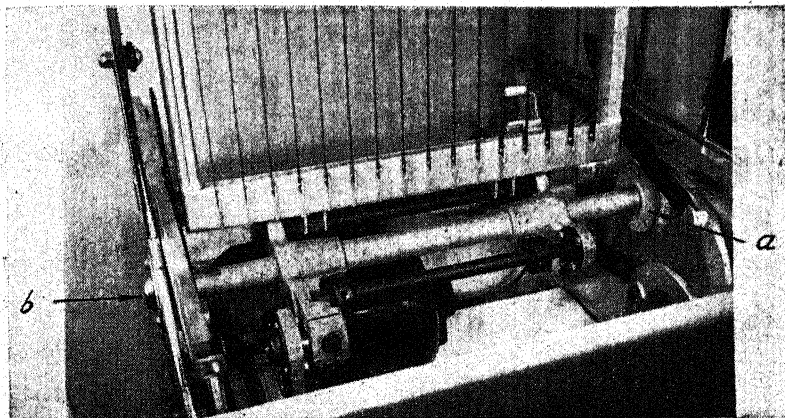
Rocker supported at ends by two bearings, "a" and "b".
